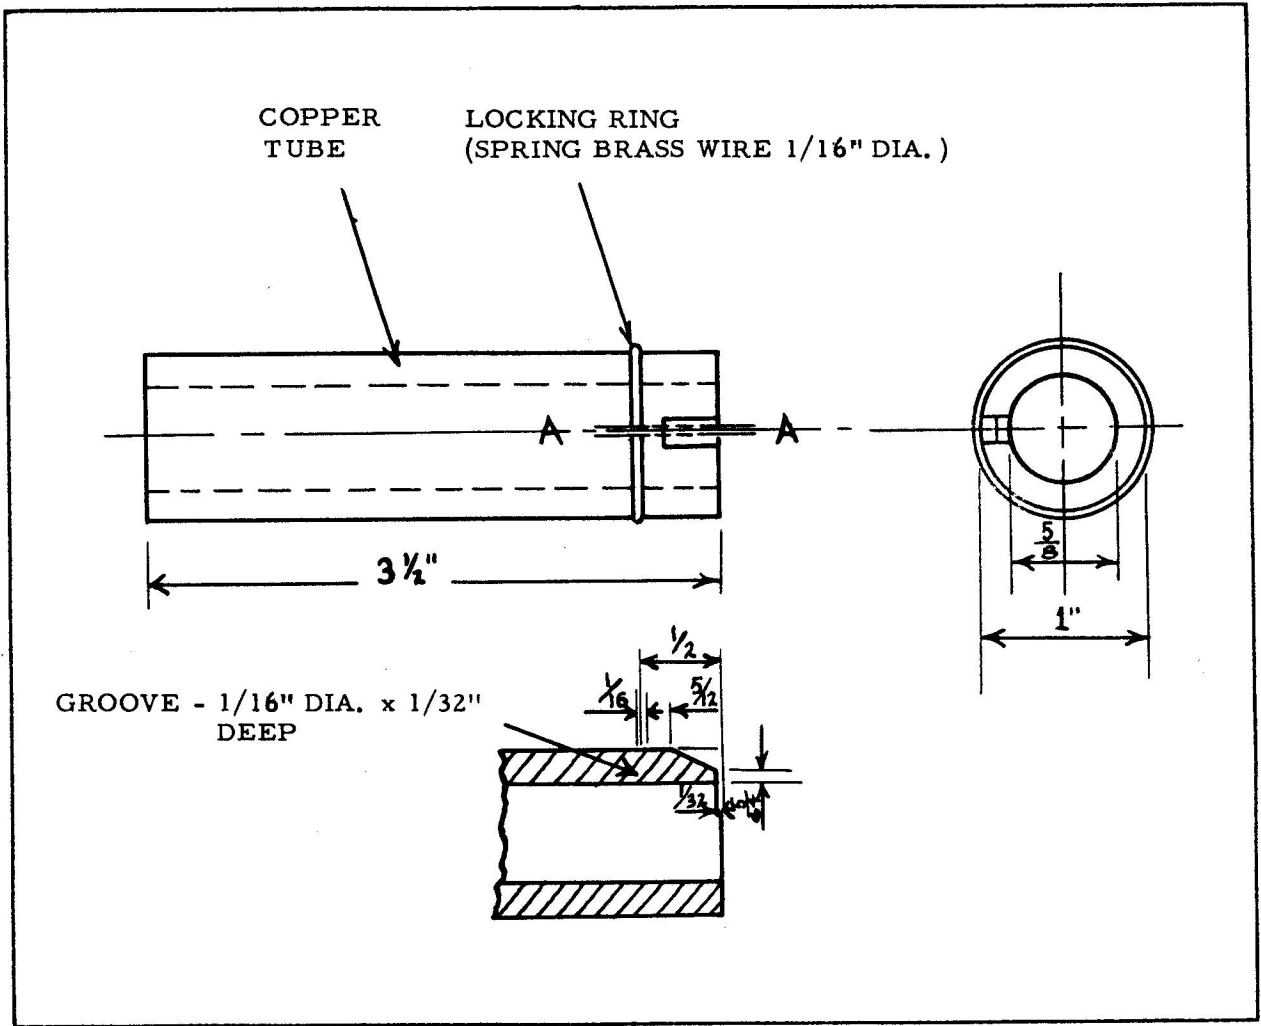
Adaptor for IT/1395 Soldering Iron Material as Shown
